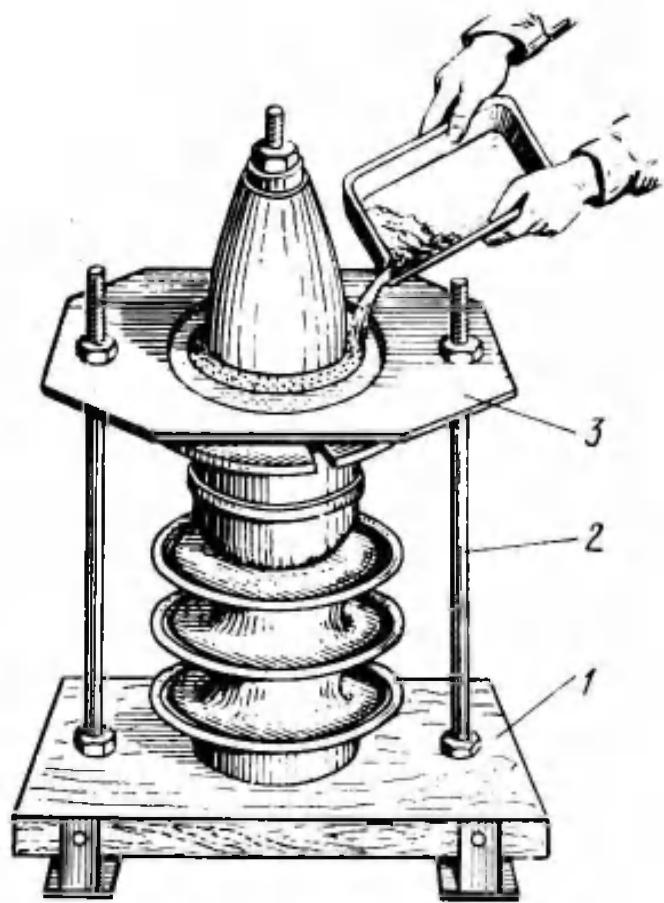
Installing a terminal bushing in a fixture and pouring cement
